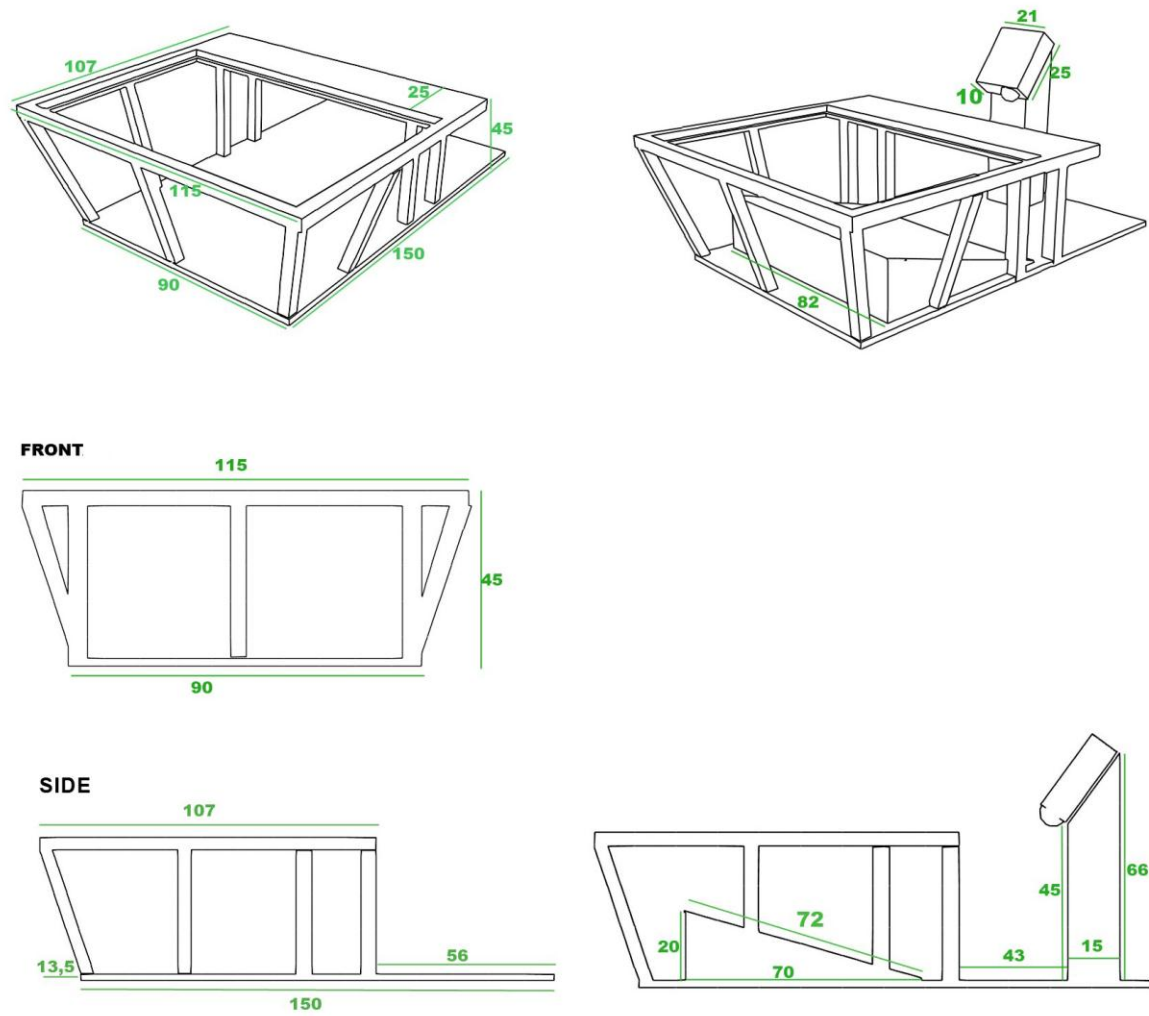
Outline of tabletop design with sloped walls. All dimensions are in mm.
